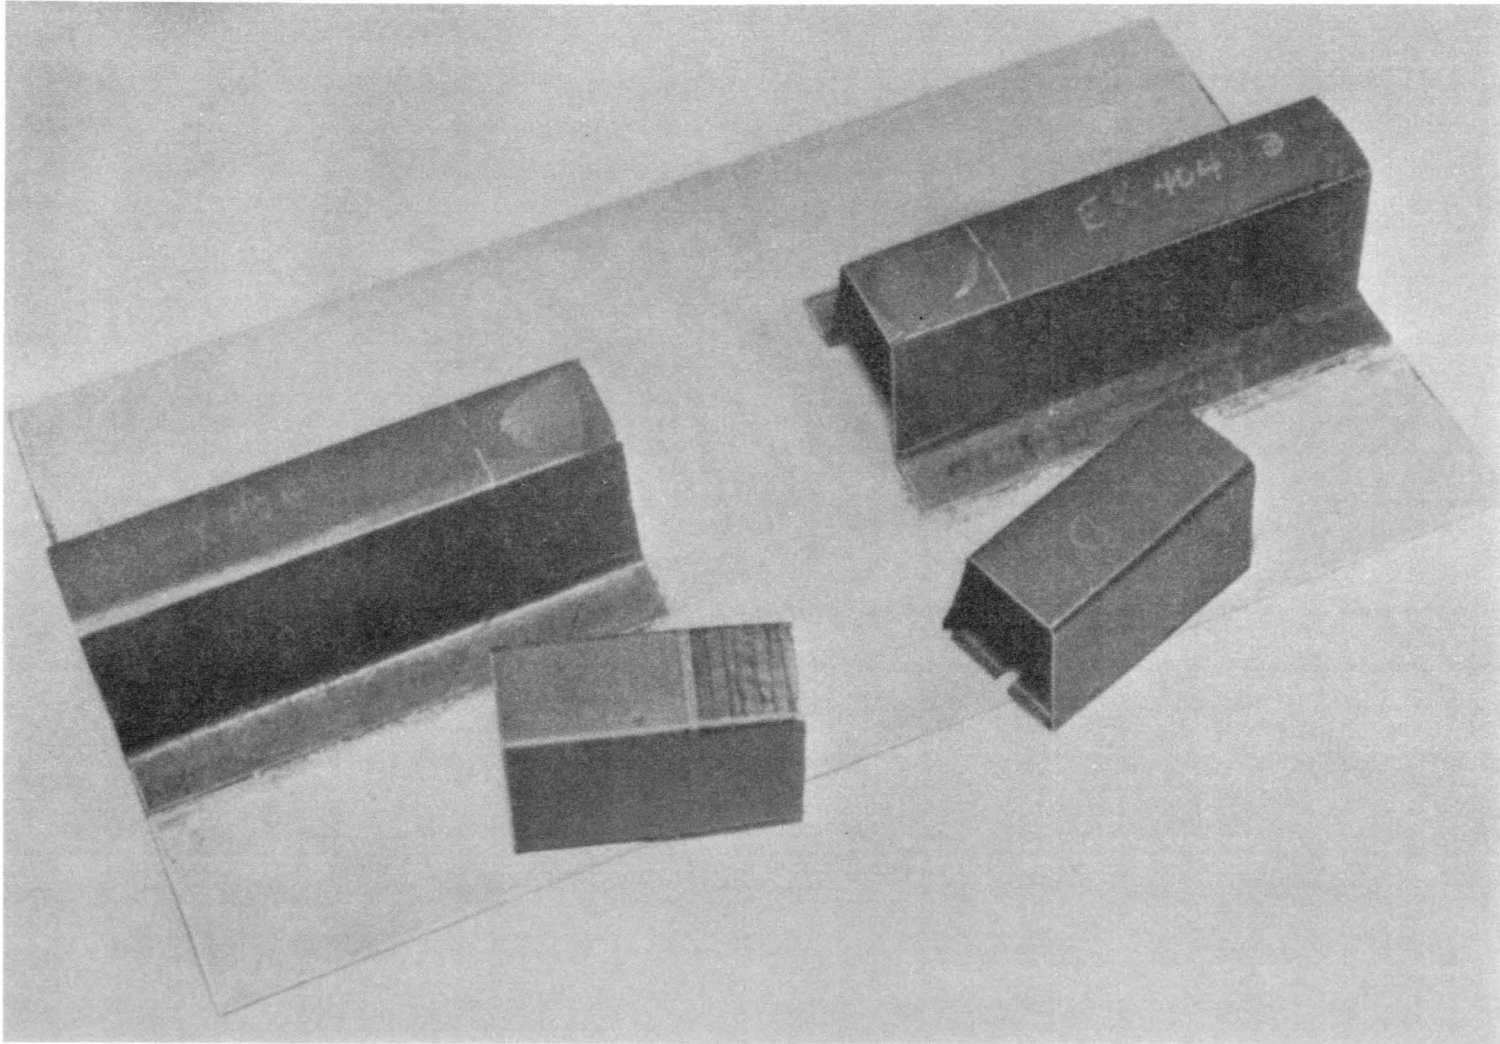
Split Internal Hat Support Ready Job Assembly
